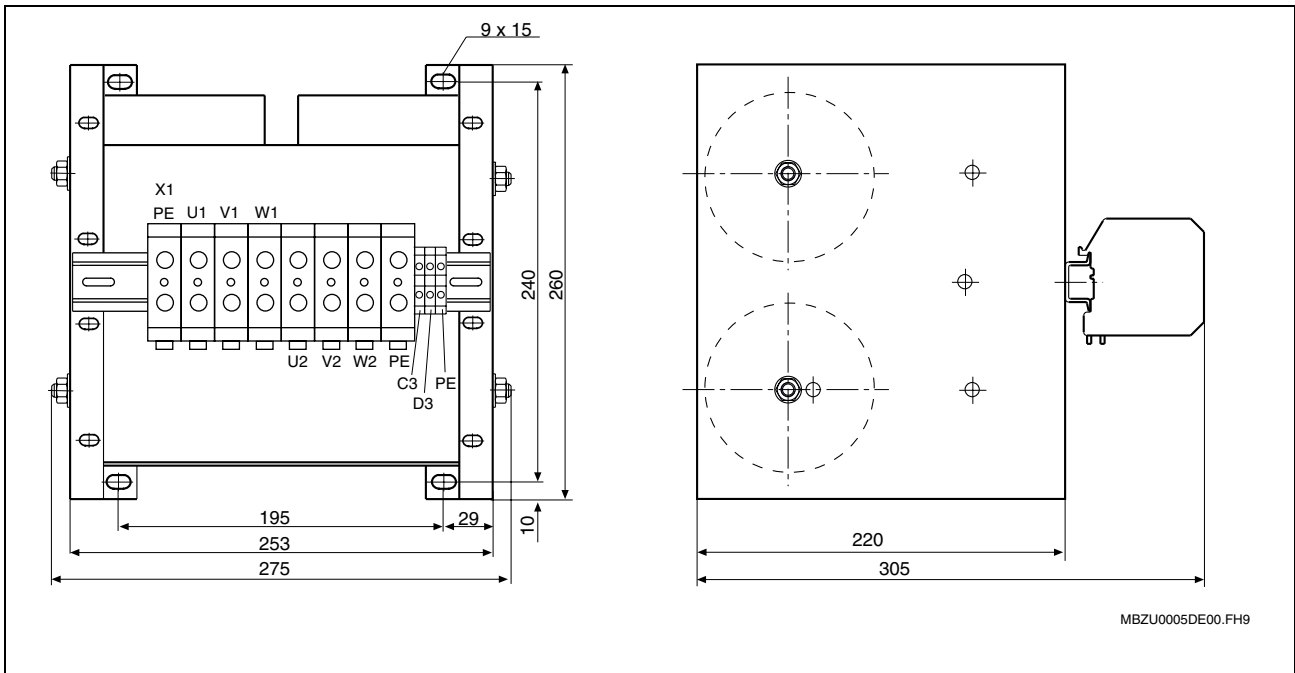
Dimension sheet for motor filters 010 / 030 / 056 / 008 / 028
